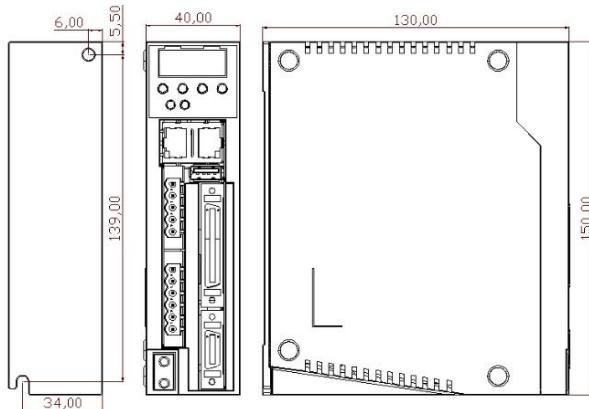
RT10-EA005L appearance and dimensions (Unit, mm)
